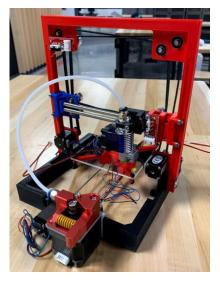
Assembled 2020-2021 Palm Print prototype (open)
